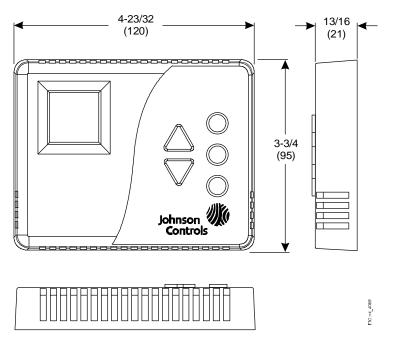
WT-4000 Series Pneumatic-to-DDC Room Thermostat, Dimensions, in. (mm)
